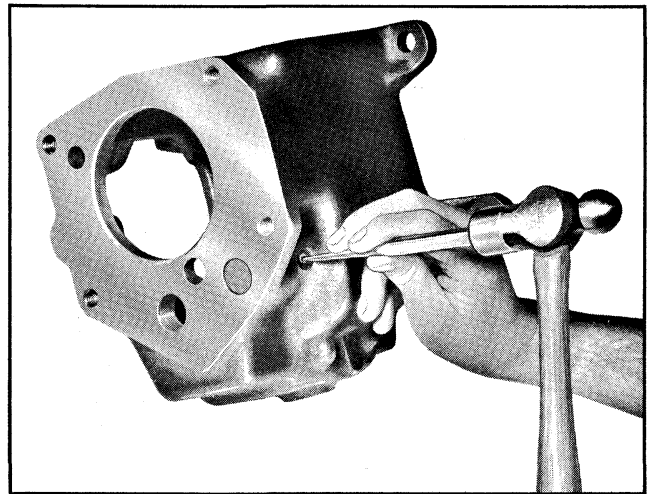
Driving Reverse Idler Shaft Lock Pin into Shaft
